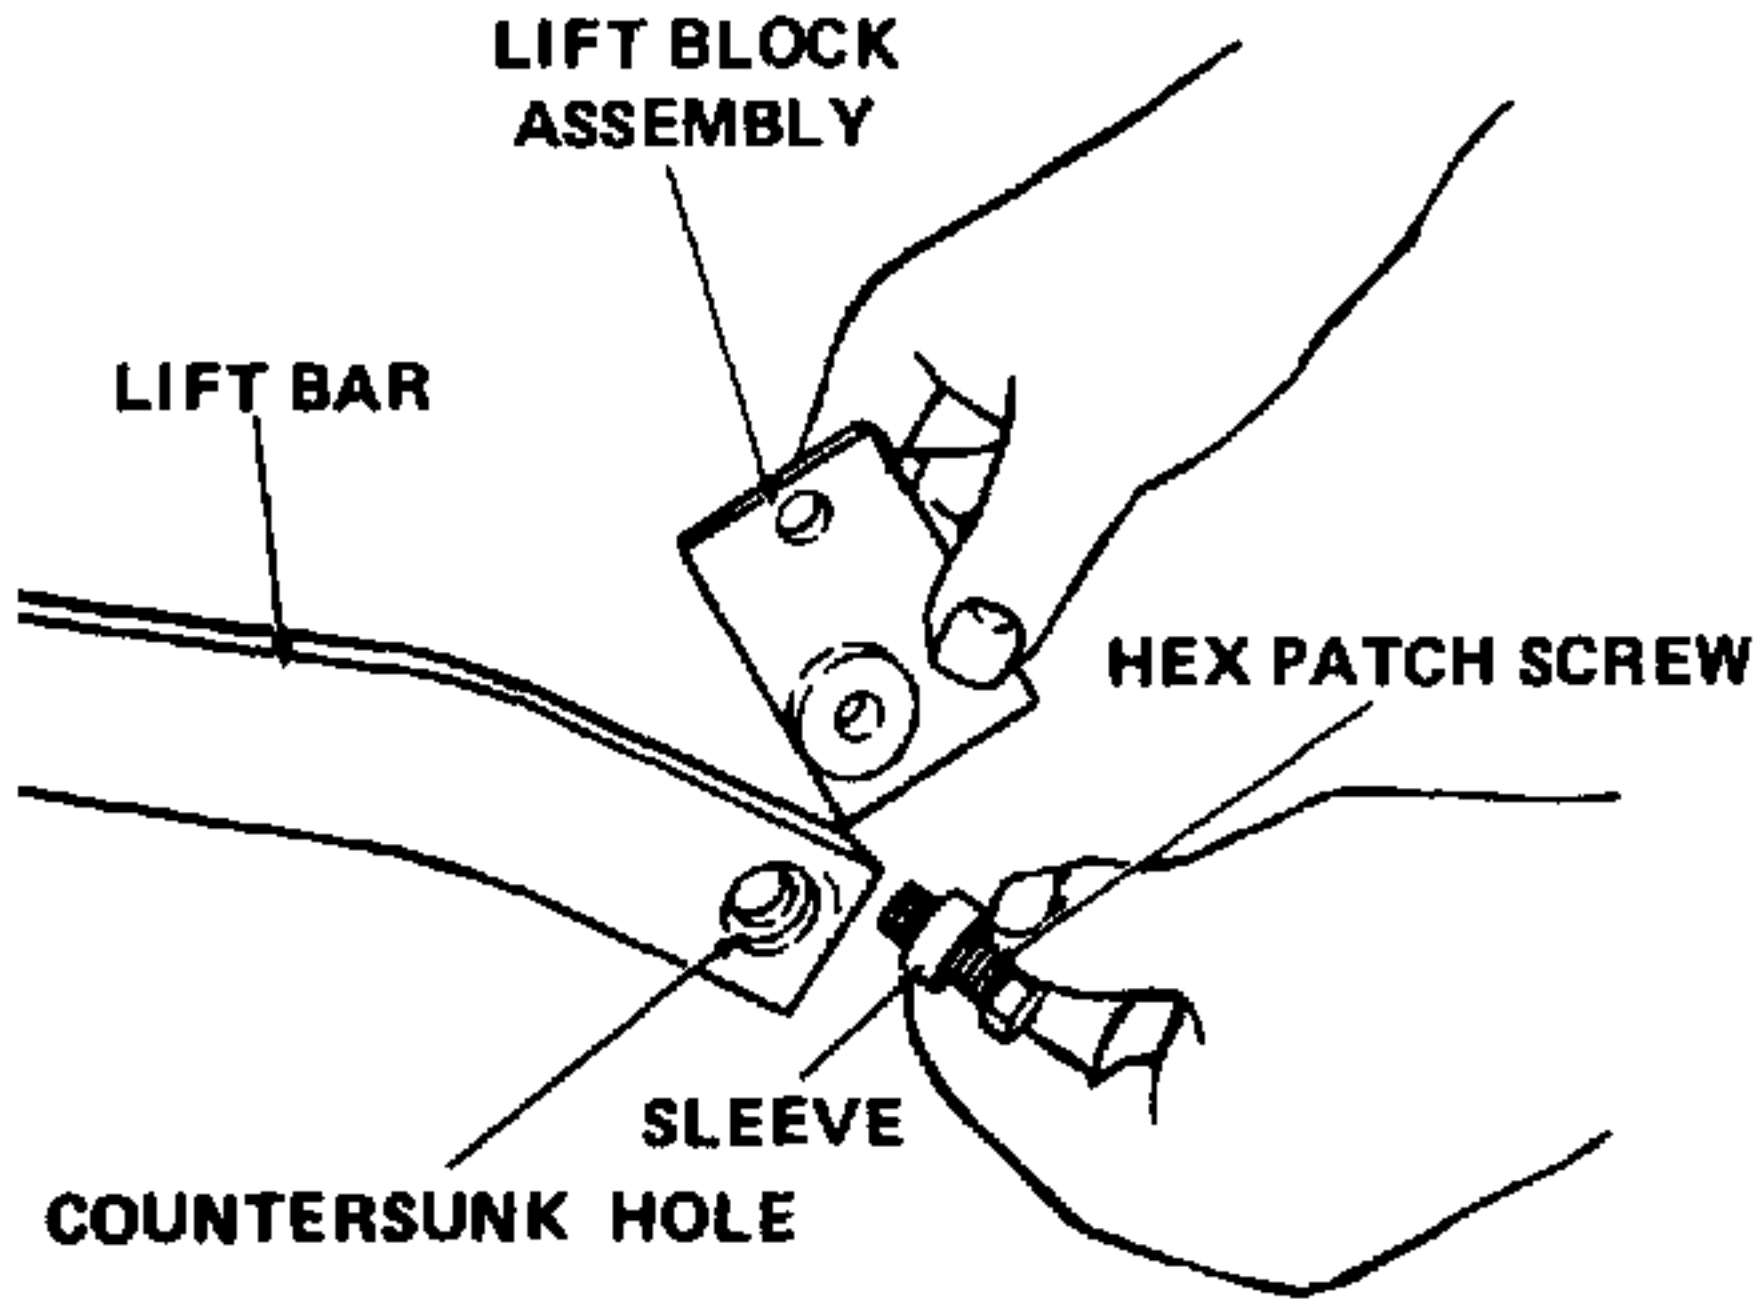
Installation of Lift Block Assembly on Lift Bar (Manual Lift Tractors).
